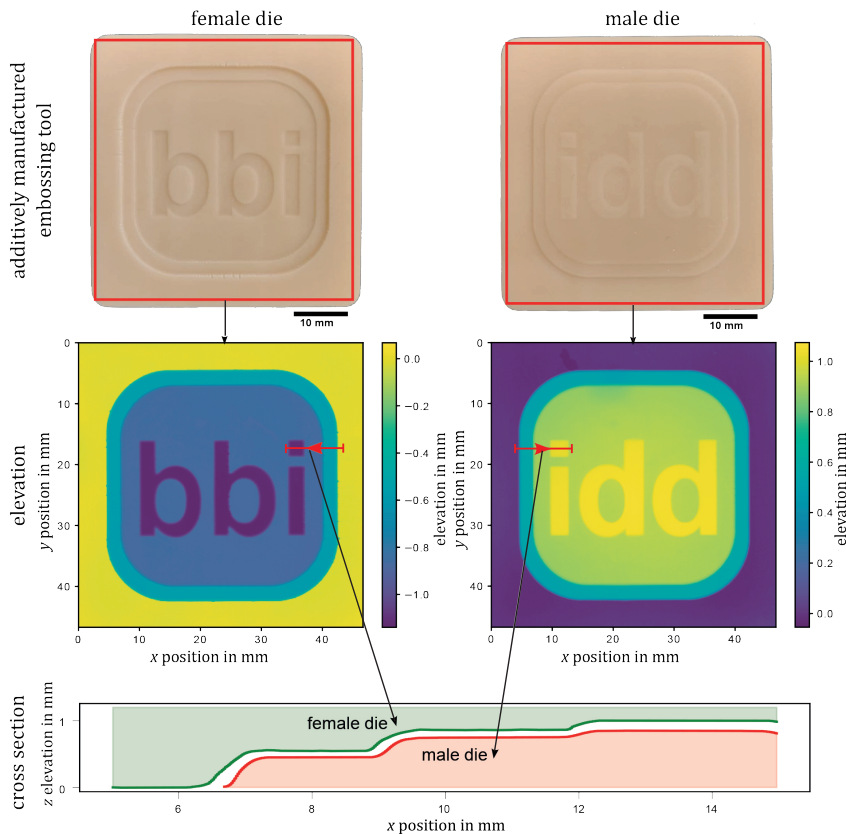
Display of a relief analysis of the additively manufactured embossing tool; 3D scans of the relief surfaces of both dies were realized using an optical profilometer, the figure shows images of the manufactured female and male embossing die, where the area of the scan is highlighted in red; the scanned surface elevation as well as a cross section view of the closed dies are displayed below
